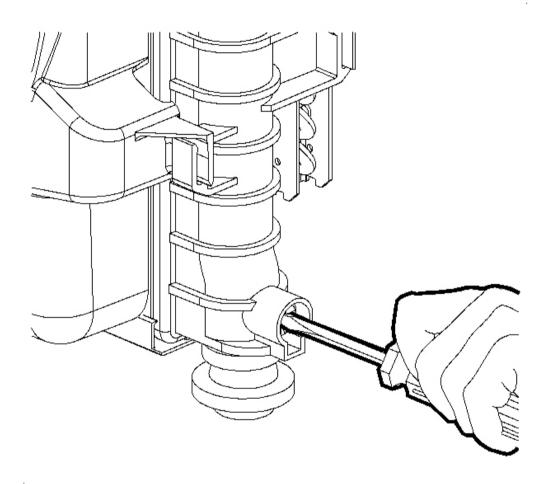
View Of Drain Valve Courtesy of GENERAL MOTORS CORP.
